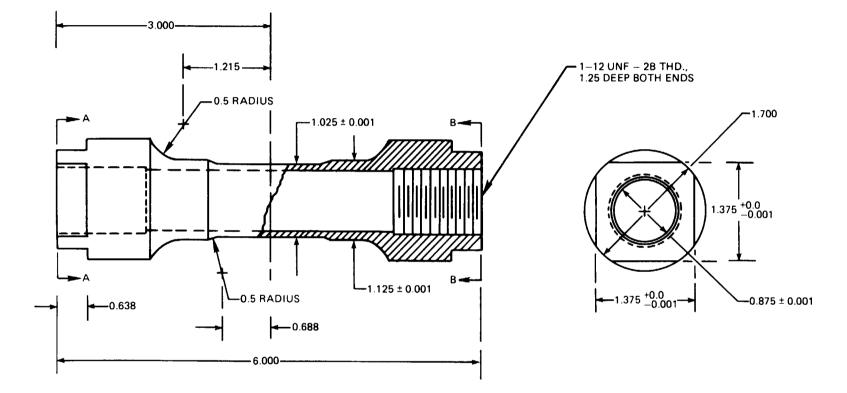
Schematic of the test specimen. Dimensions in inches. (1 in. = 25.4 mm)
